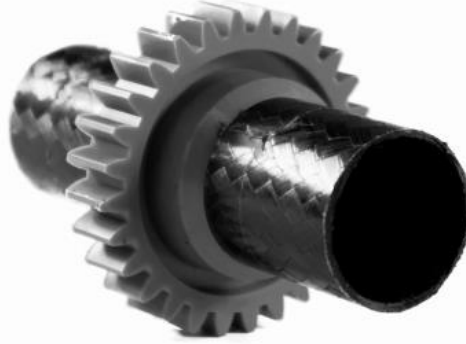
Prototype continuous CF-PAEK driveshaft overmoulded with a short CF-PEEK gear, supplied by *Victrex Europa GmbH* [14].
